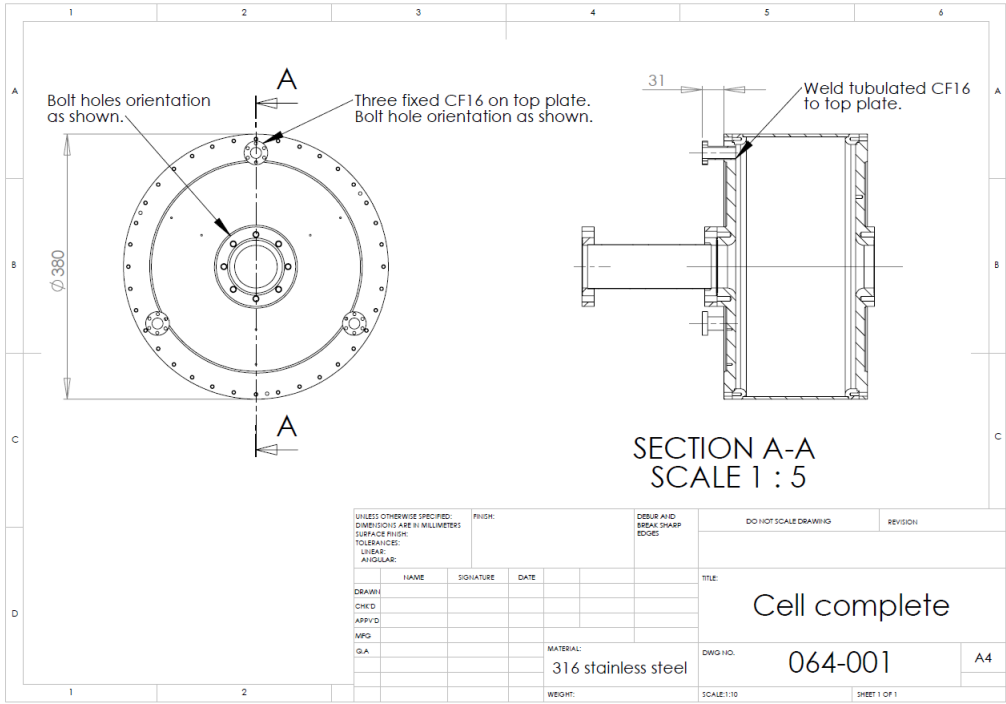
Drawing of the SV with a CF63 extension tube attached to the top plate.
